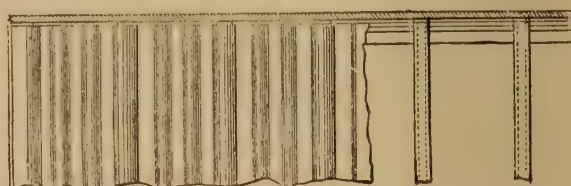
PLAN. THE WINSLOW CAR ROOF.
